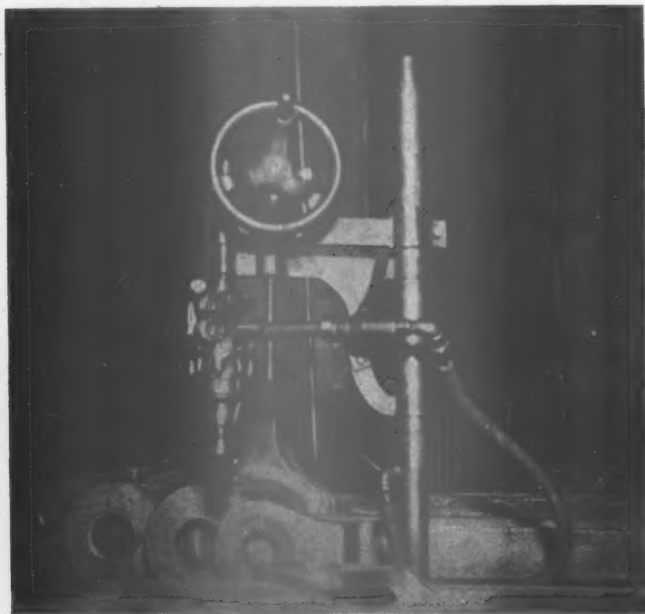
Locomotive rods can be drilled with this device without unnecessary handling
